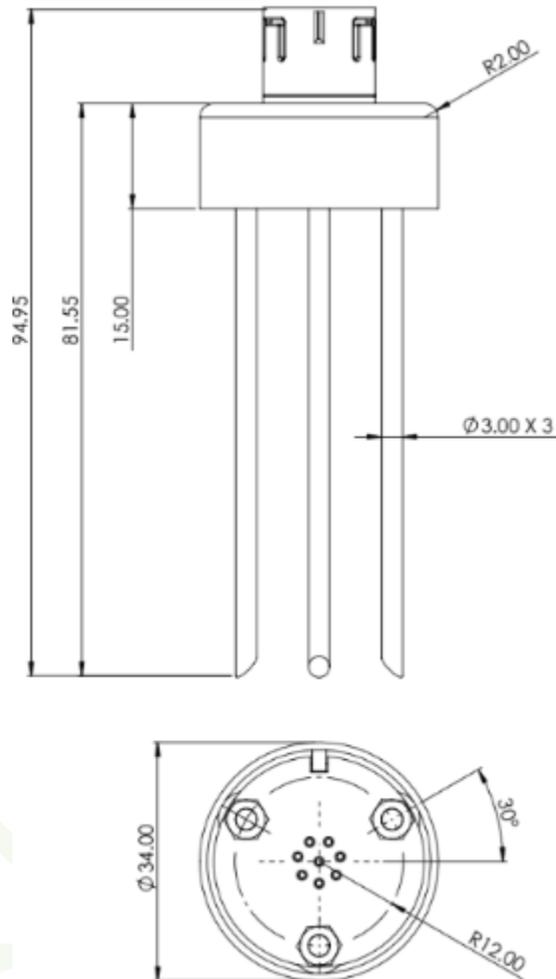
EZ-SSP101 Physical Dimensions (mm)
